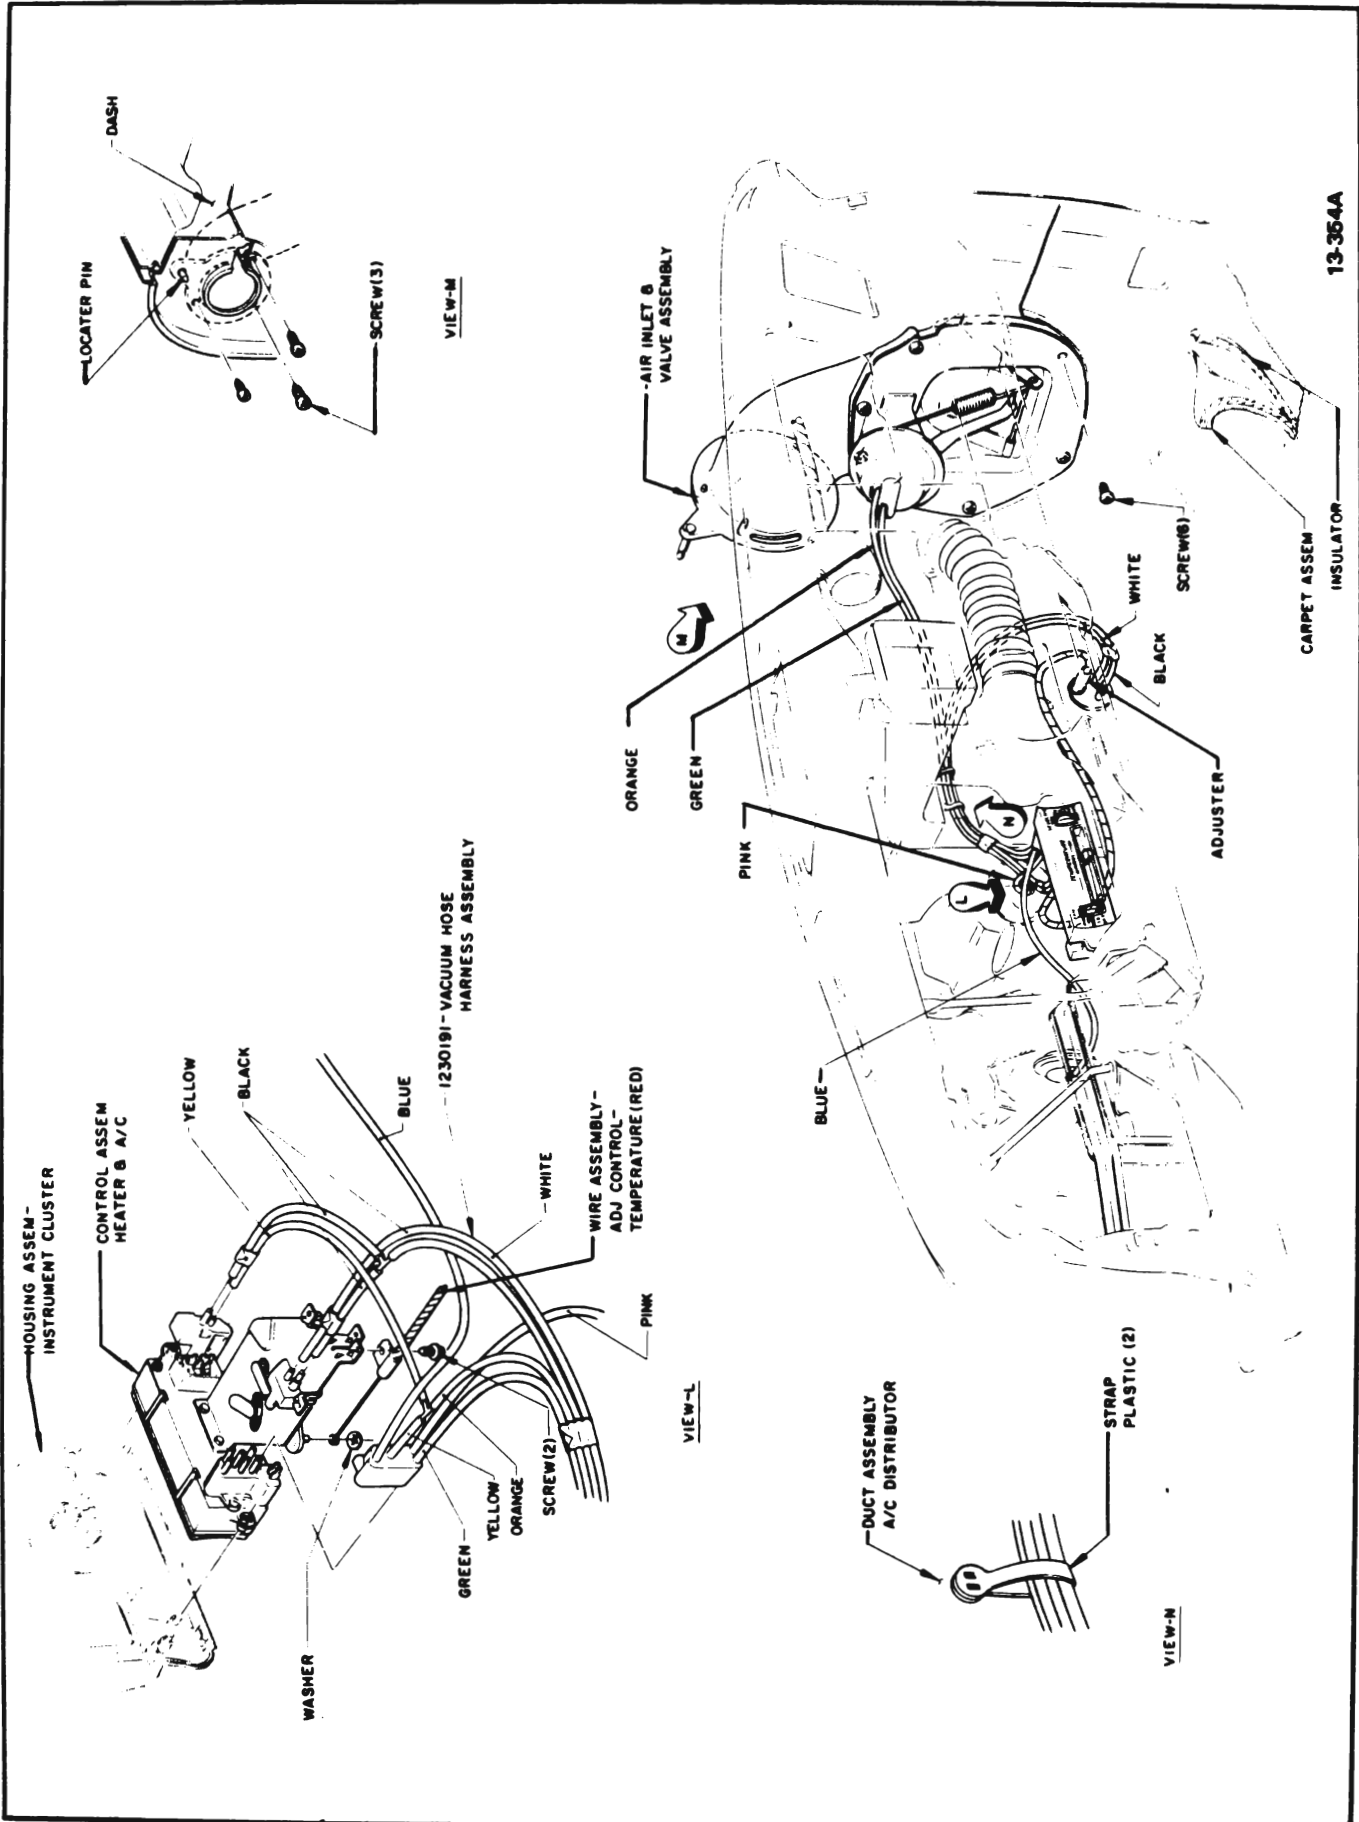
49000 Series Control Wire and Vacuum Hose Installation
